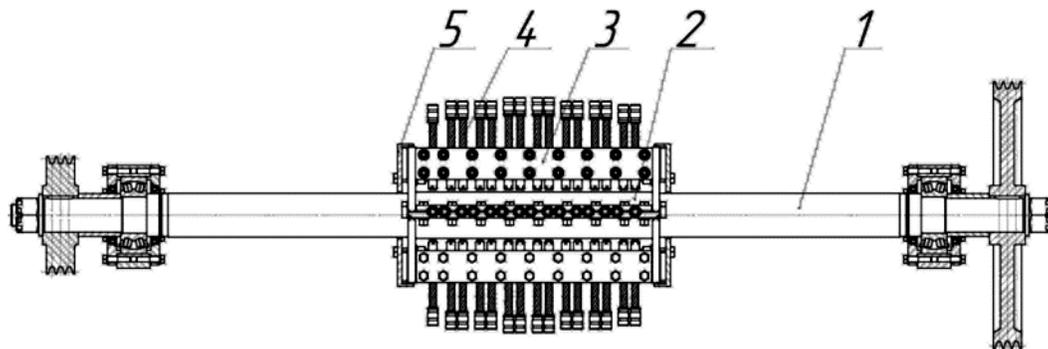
Cable rotor of mixer: (1) shaft; (2) drum; (3) removable blades; (4) cable elements; (5) lock
